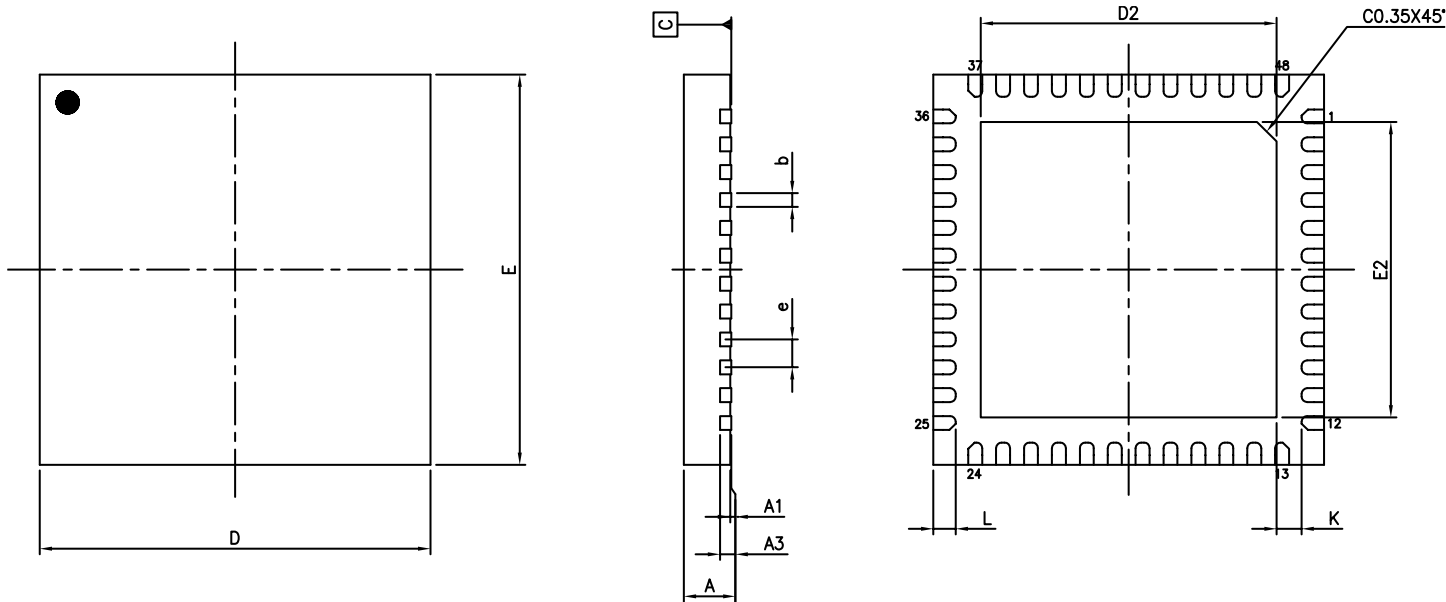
ES9027SPRO 48 QFP Package Dimensions
